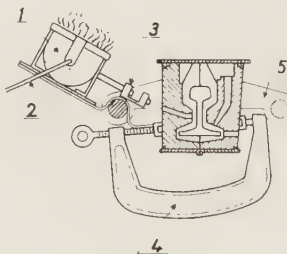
Thermit-pressure welding with plate. Mould in place ready for preheating the rails and for doing the welding.
